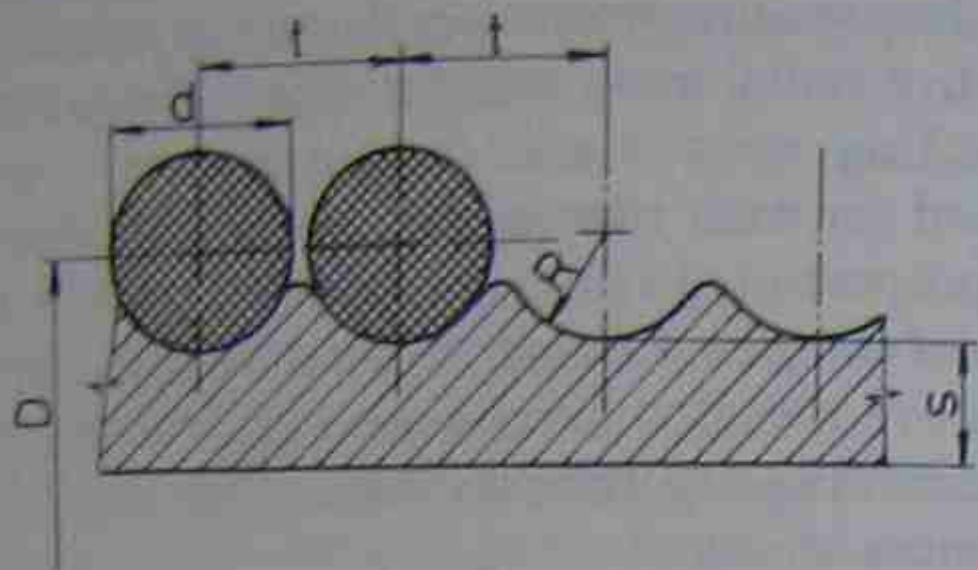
Profile and dimensions of the threaded portion of a drum.
